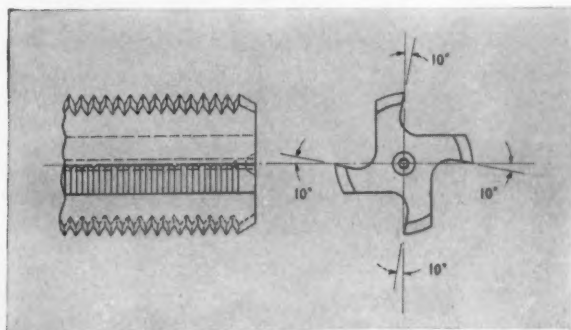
For producing smoother, more uniform threads in magnetic ingot iron, taps should be ground as indicated herewith.
